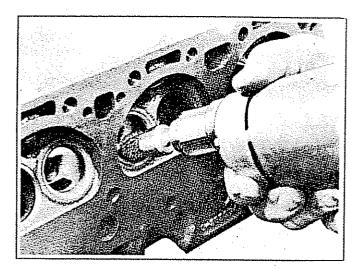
A2-17-Cleaning Combustion Chambers-Typical
